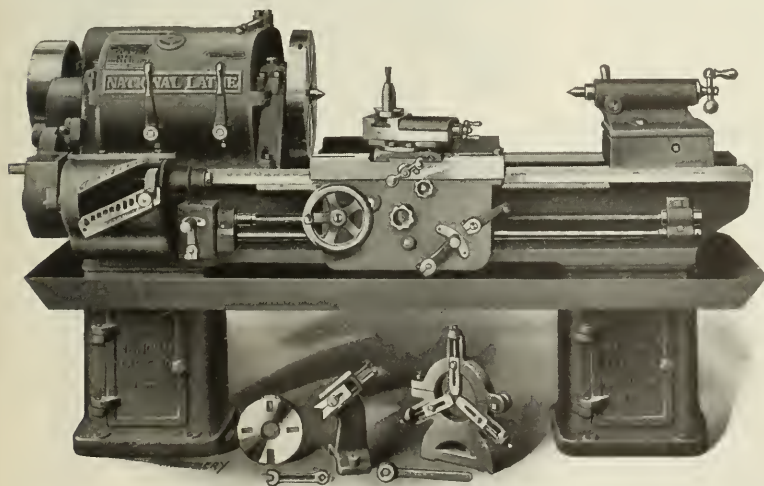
Geared-head 18-inch Lathe built by National Lathe Co.
